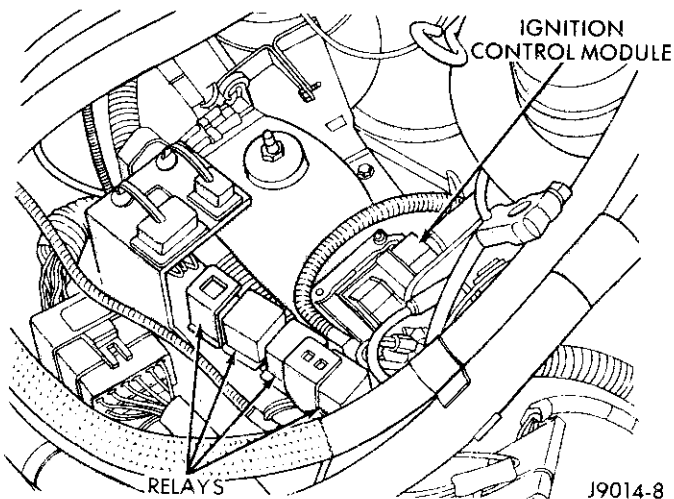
Fuel Pump Relay, B+ Latch Relay, A/C Compressor Clutch Relay
